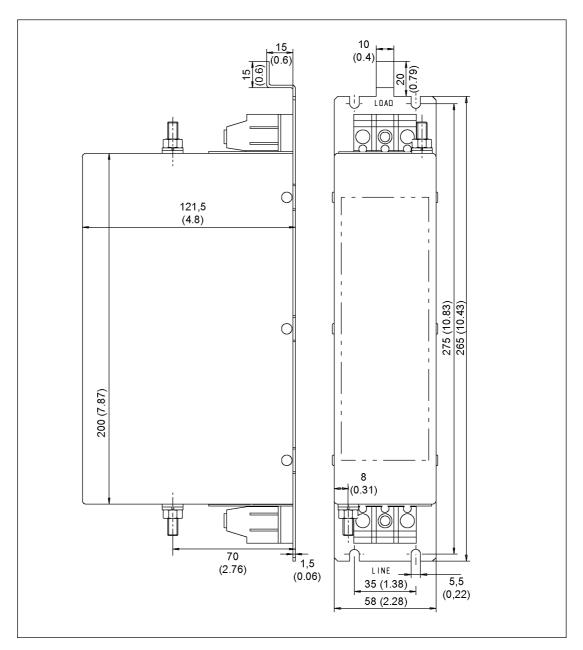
Dimension drawing of the line filter for the Smart Line Module (5 and 10 kW)
